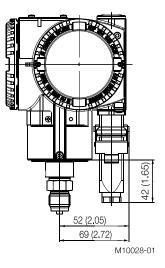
Harting Han plug connector - gauge / absolute pressure transmitter (application example)
